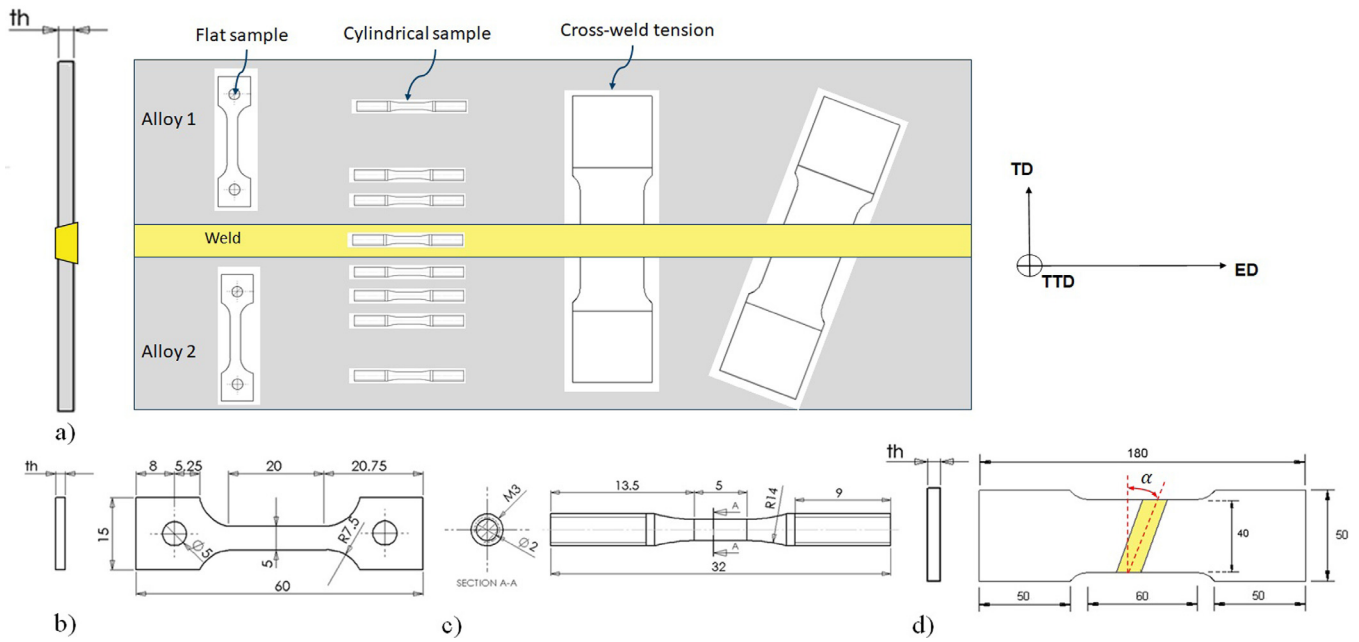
(a) Illustration of dissimilar welded plates, (b) Flat tensile test specimen, (c) cylindrical tensile specimen and (d) cross-weld tension specimen. TTD, TD and ED respectively denote through-thickness, transverse and extrusion directions.
